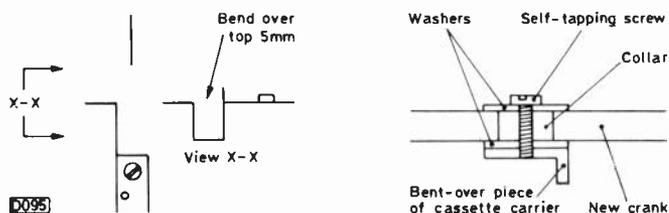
(left): Connecting the crank to the rear right side of the cassette carrier.
